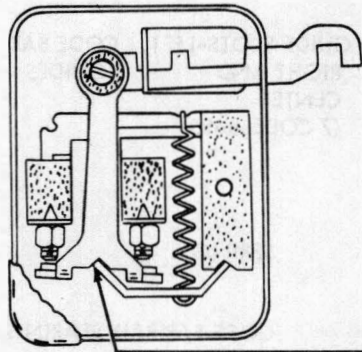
Keyboard Lubrication — Line Feed, Keyboard Lock and Margin Indicating Mechanisms
